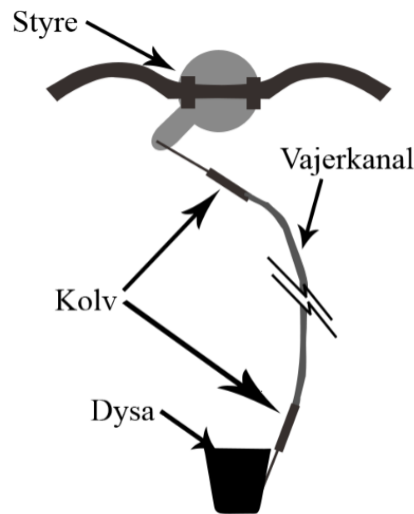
Construction connecting the steering wire with the steering shaft, from [22]
